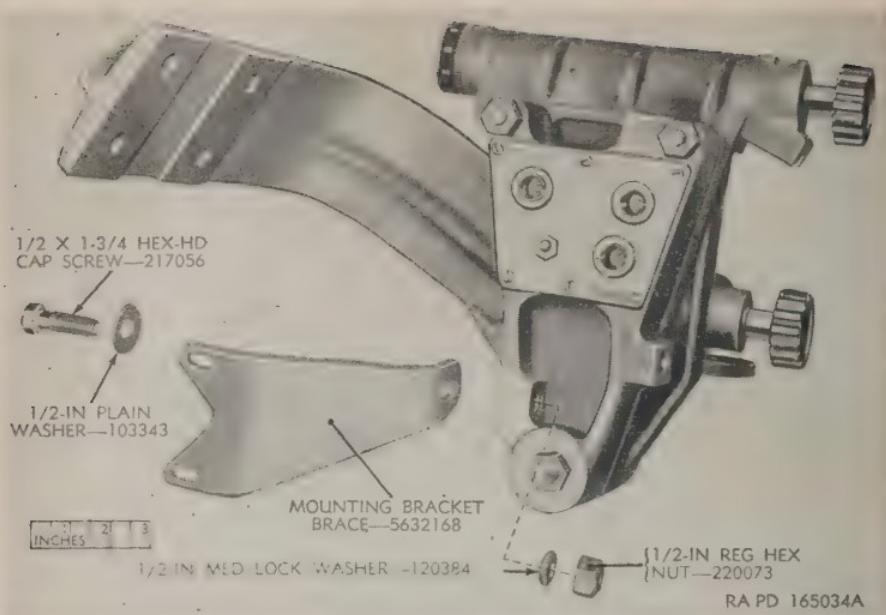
Telescope mounts M52C and M52D—removal of the mounting bracket brace.
